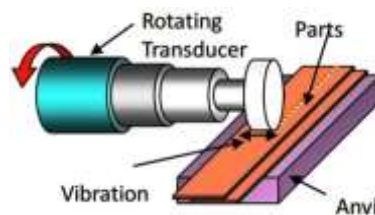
Ultrasonic seam welder [14]
